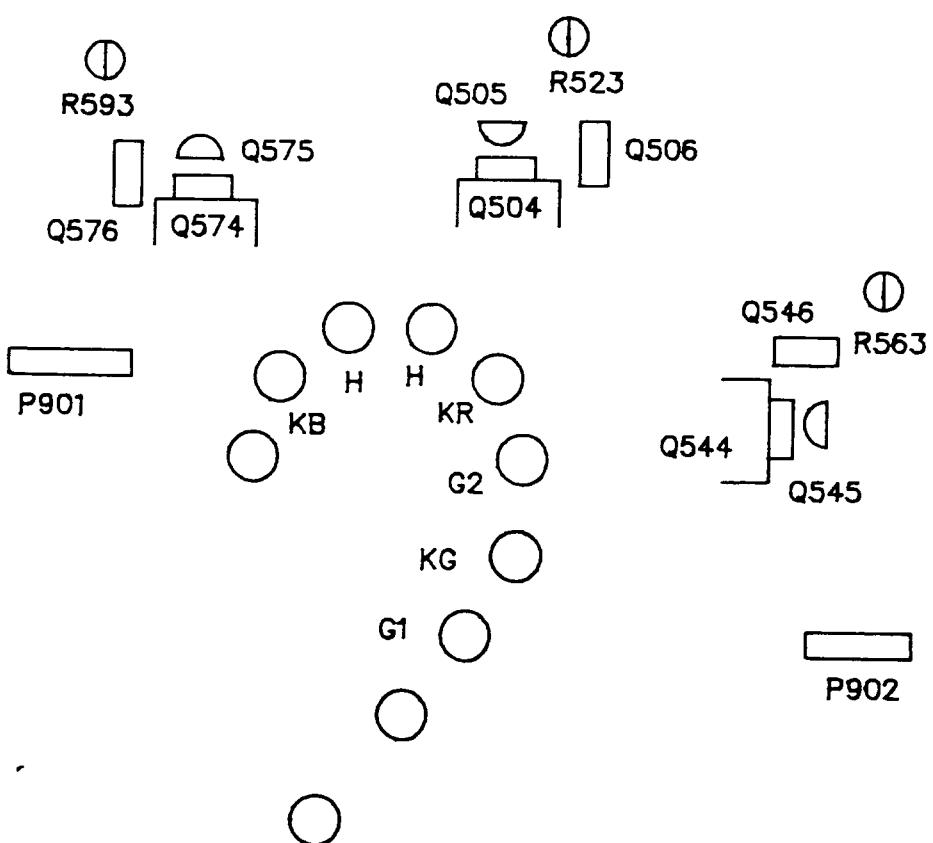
PCB-CRT DRIVE adjustment and test location
